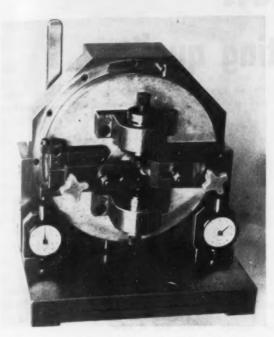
Fixture used for boring and grinding the holes in the ears. After boring part undergoes several other operations, including slotting, and then is returned for grinding.
